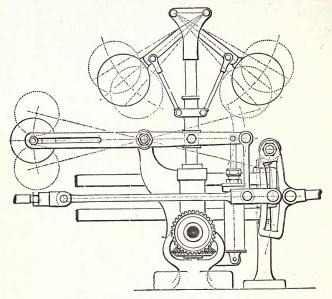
Automatic expansion-gear of the engine shown in Fig. 366.
